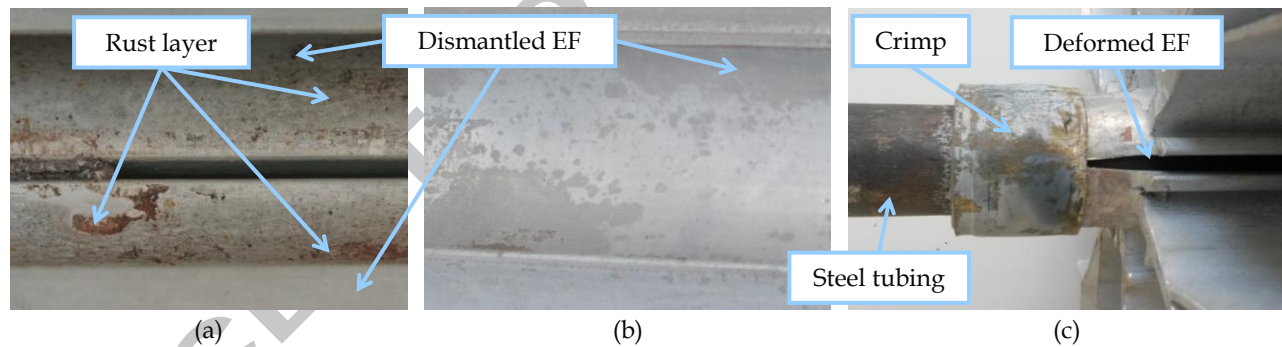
Operating conditions testing: Dismantled components after testing under operating conditions. Inner side of a fin from a (a) clipped assembly and (b) crimped assembly. (c) Crimped assembly showing gap between fins and tube.
